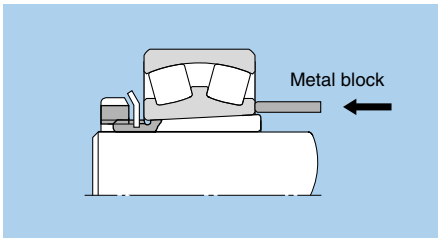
Removal of Bearing W/Adapter Sleeve
